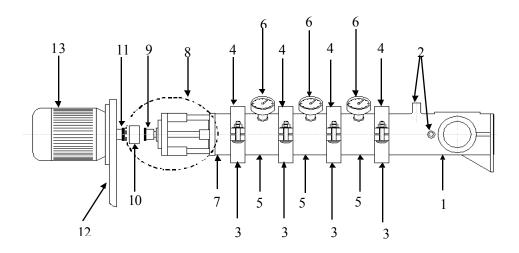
External Barrel Configuration with Cutter Head Assembly
